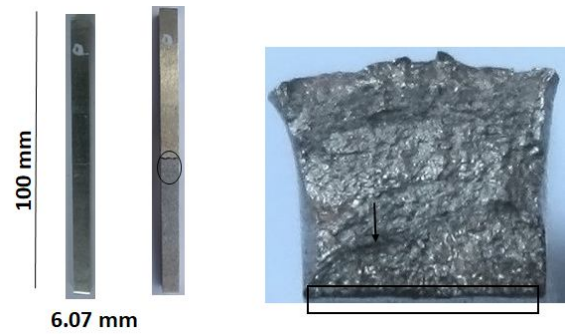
Specimen with defect. Test piece with final crack. Test specimen surface fractured in arrival condition with filler material ER-310.
